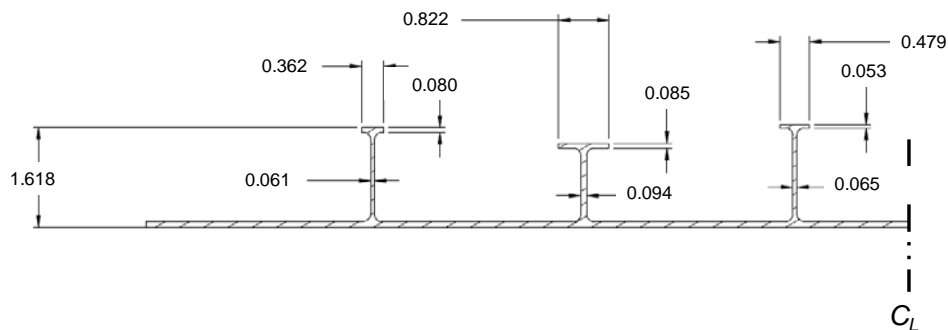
Dimensions of flanges and webs of T-stiffeners, viewing left half of Section A-A from Fig. 5. (Dimensions are in inches.)
